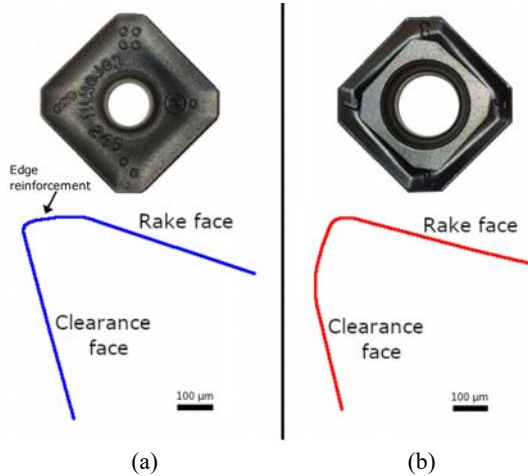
Cutting edge for, (a) tool S (b) tool I (see online version for colours)
